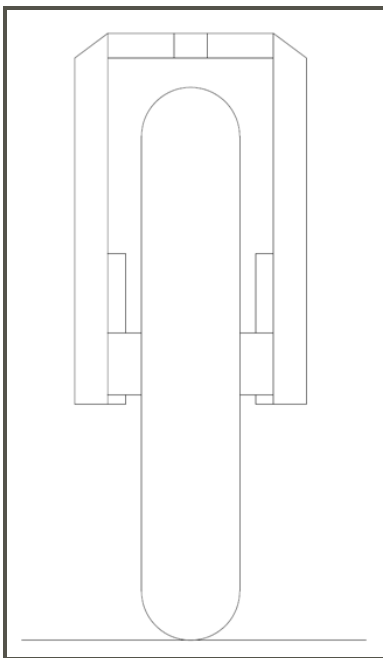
Cross Sectional View of Wheel Pant Assembly
